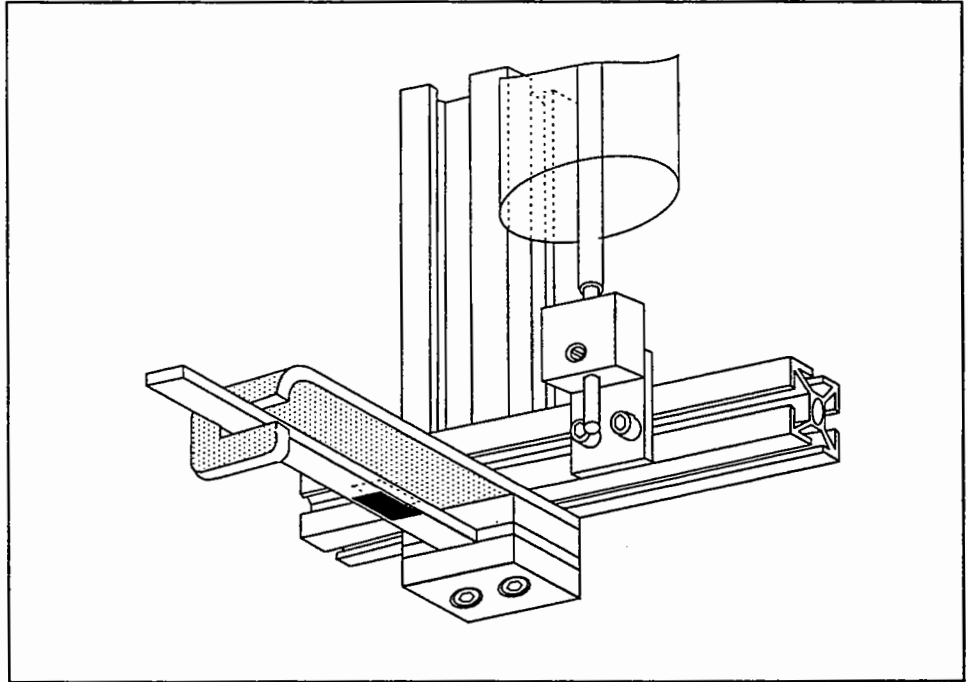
Assembly of back pressure sensor and deflecting arm force sensor
